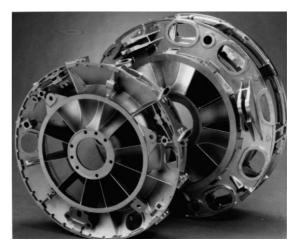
Photos of two cast Ti alloy engine frames showing the detail that can be achieved by the casting process.
